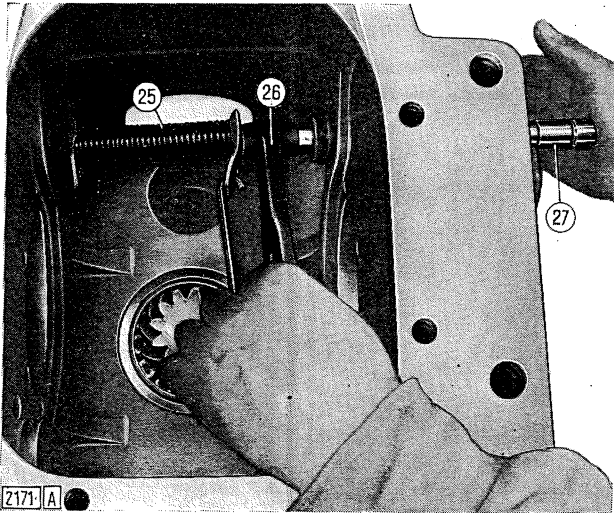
Installing the return spring (25) on the rod (27) of the differential lock fork (26) using the tool A 287033.
